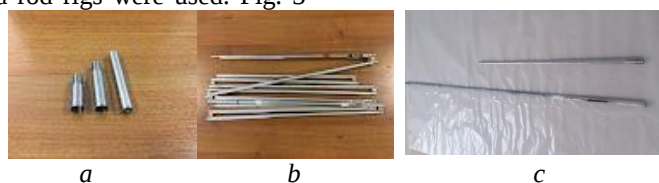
Photo view of the collet (a), rod (b) and developed a new non-standard tools (c) for the removing 2 emergency Co-60 sources.
